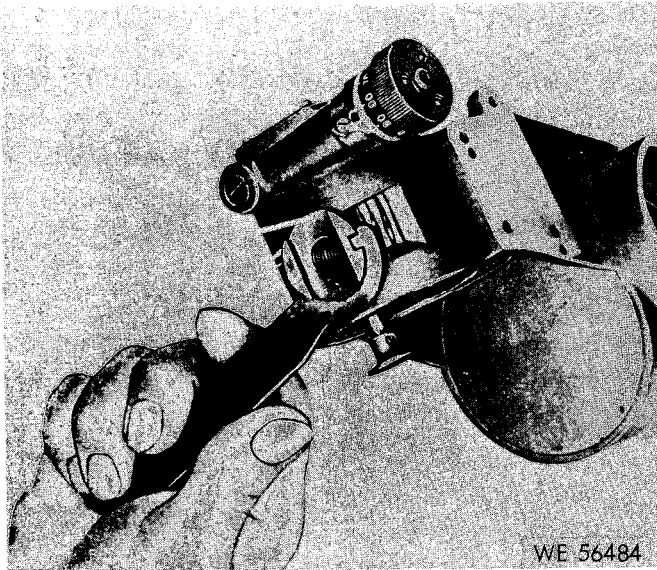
Using nonadjustable lug-type spanner wrench 7634533 to remove locating bushing.
